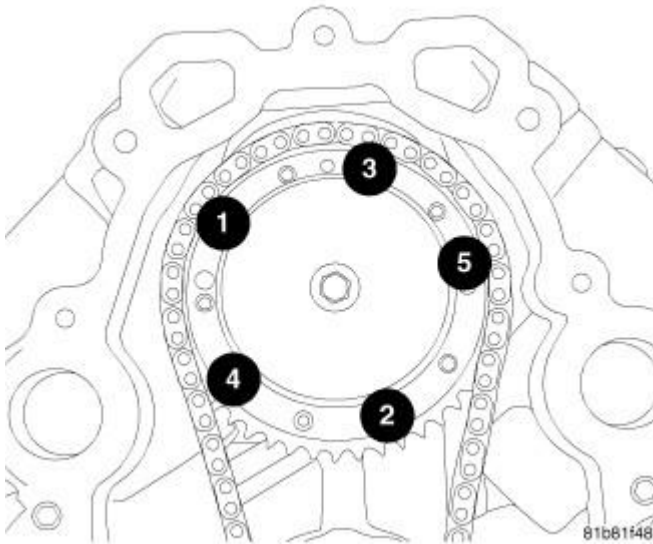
Drive Plate Outer Bolt Torque Sequence
